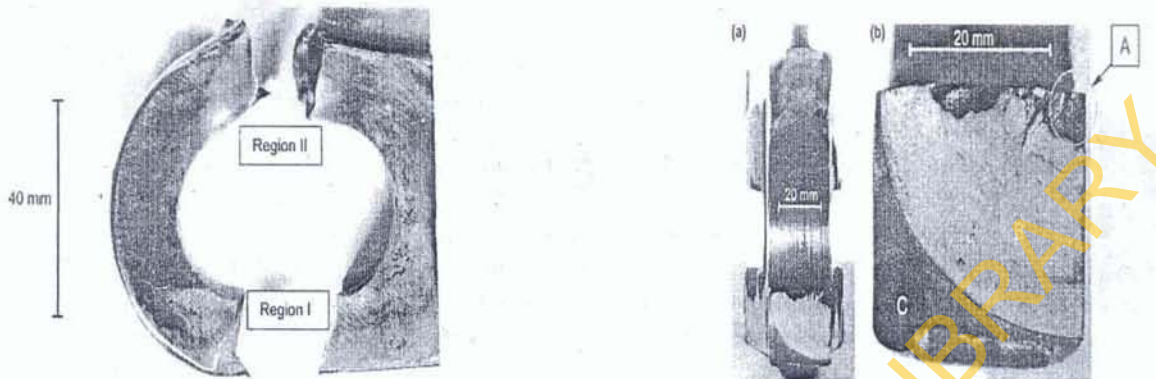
View of the lower wing lug after damage [5]. Fig. 16 (a) Cracked lug surfaces and (b) magnified view of lower fracture surface [5].
